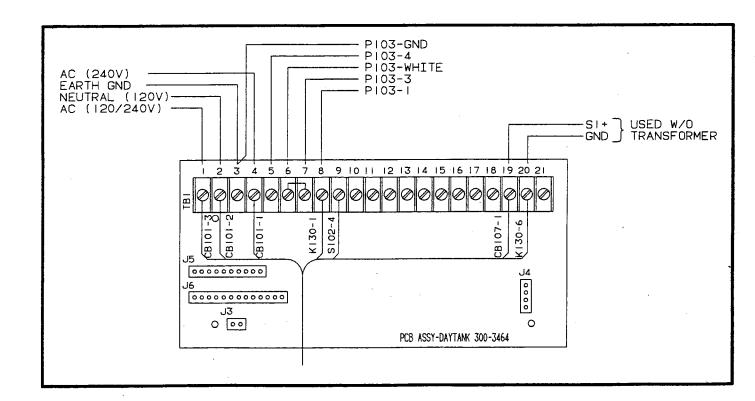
FUEL PUMP CONTROL TERMINAL BOARD
